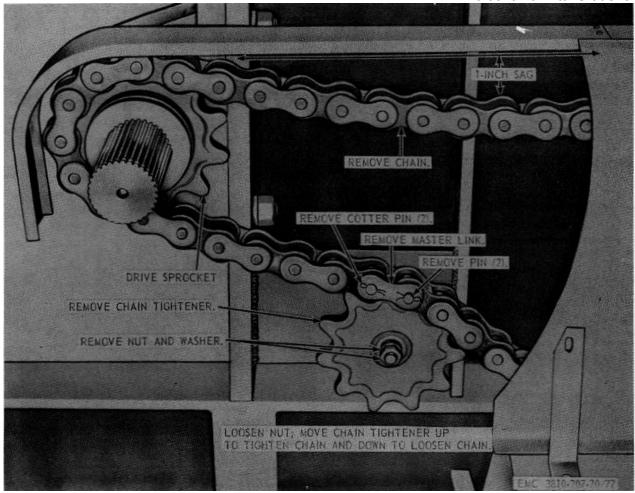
Swing shaft drive chain and tightener, removal and installation .
